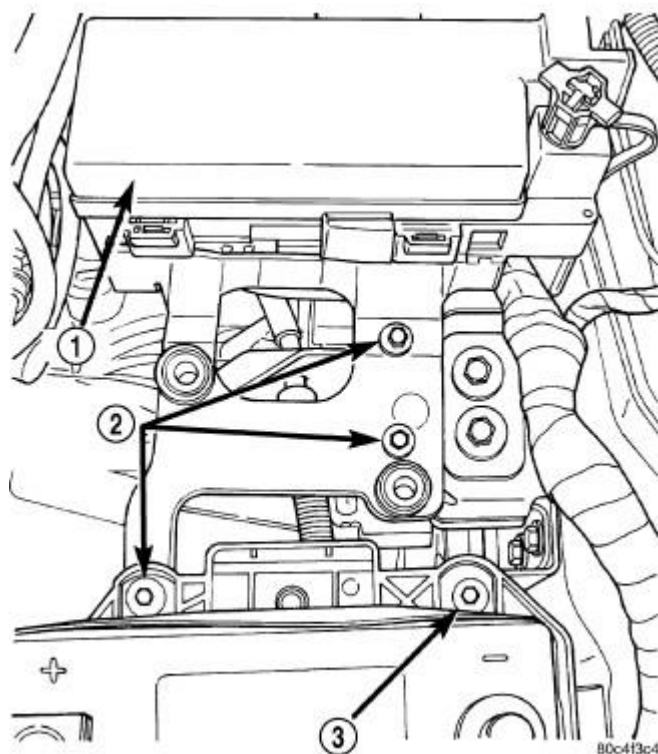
TIPM Bracket Attaching Bolts - Typical
